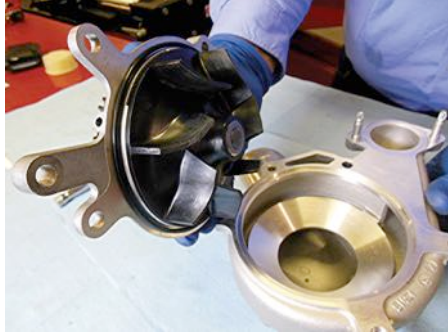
(a) water pump assembly as it looks after removal from engine.
